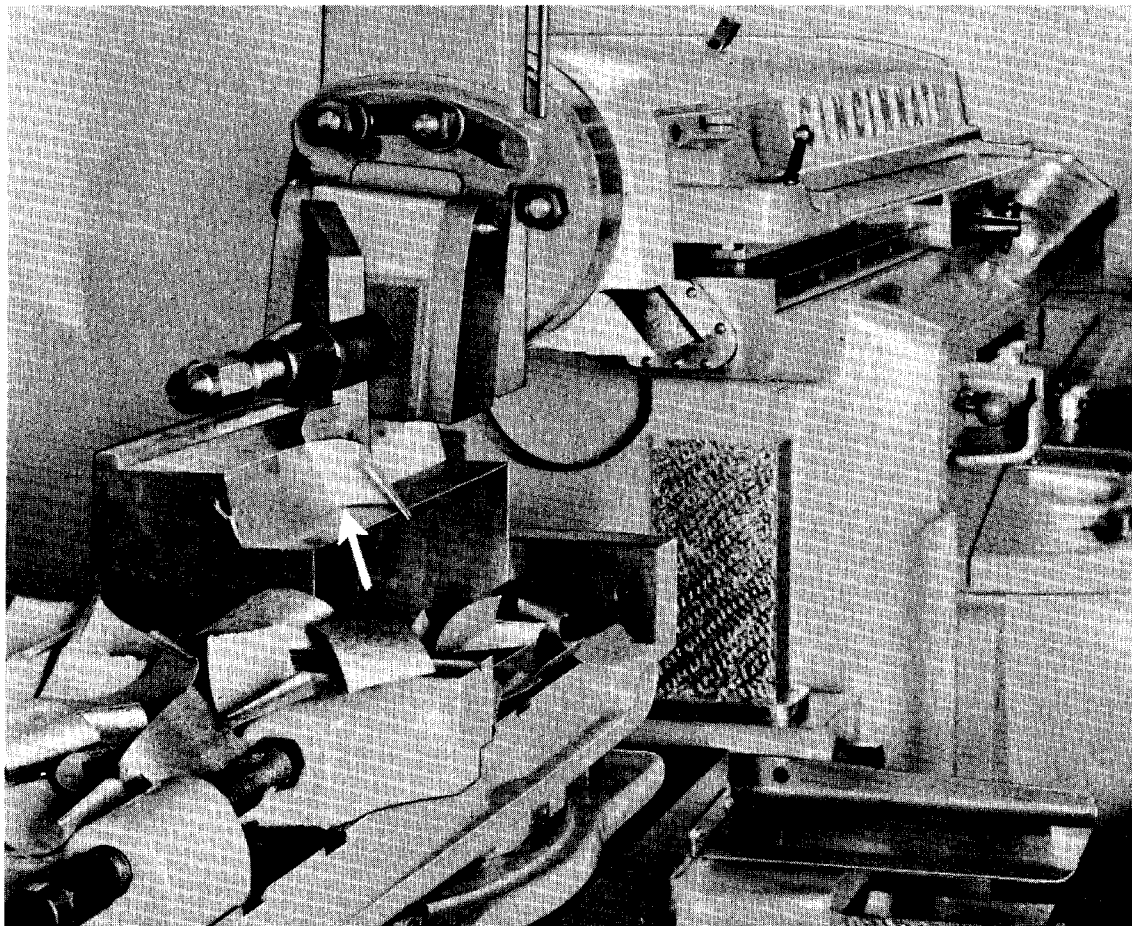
With work held in a vise, shaper is making a cut that is 2 in. (50 mm) deep and 1/32 in. (0.8 mm) thick. (The Cincinnati Shaper Co.)
